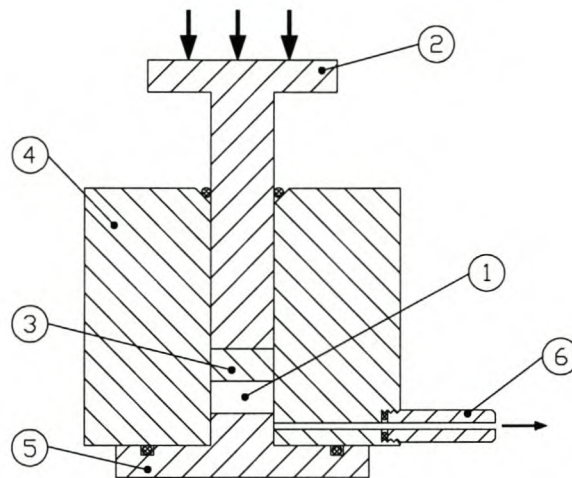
A drawing of a punch and die set used for pressing the KBr tablets, showing the KBr salt (1), the punch (2), insert (3), body (4), base (5) and connection for vacuum (6).
